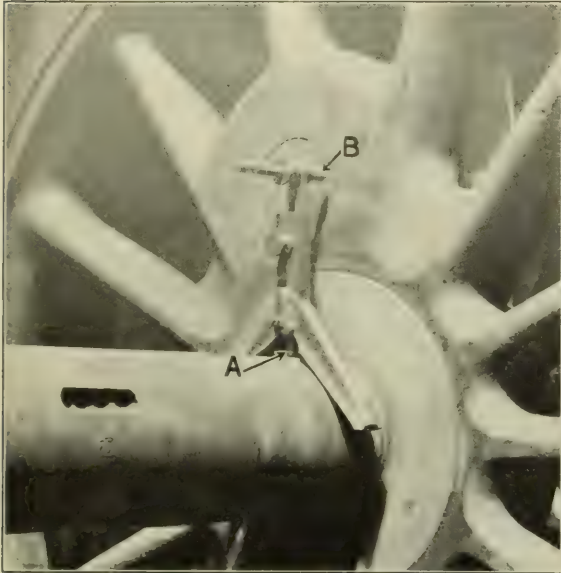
Tool for Checking Proper Location of Driving Wheel on Axle.
